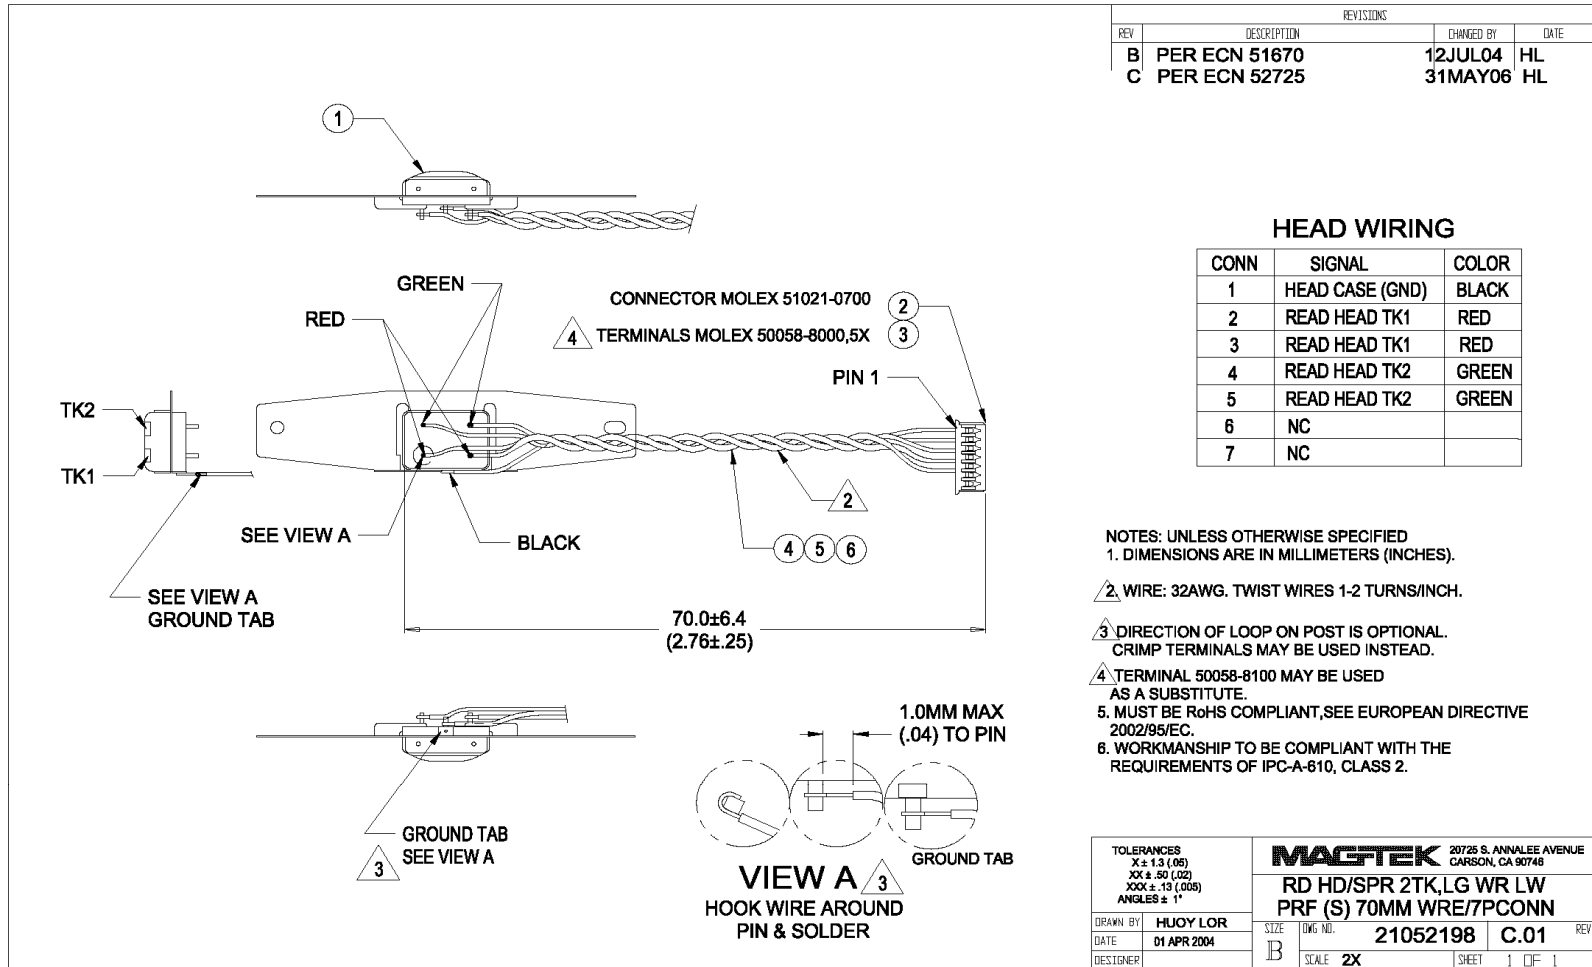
2-Track Read Head Assembly with Cable and 7-Pin Connector
